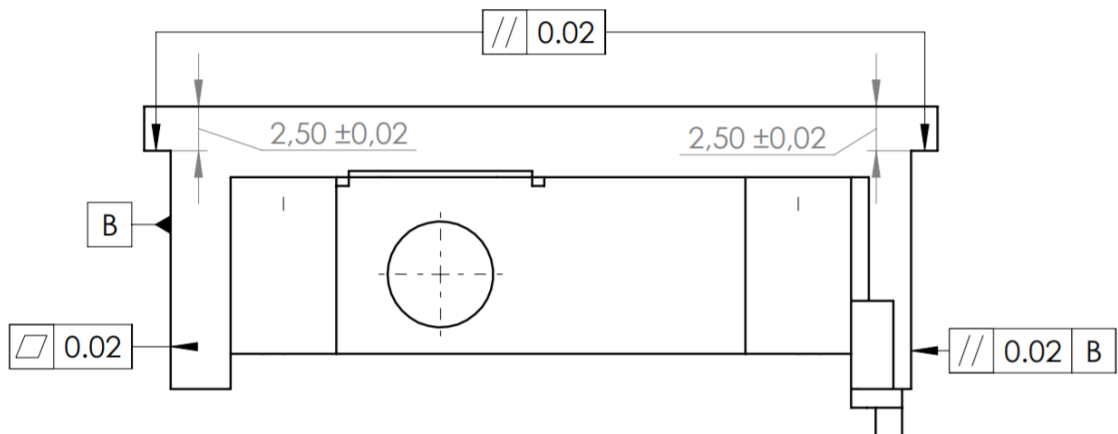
TP technical drawings LG mounting surfaces relevant tolerances
